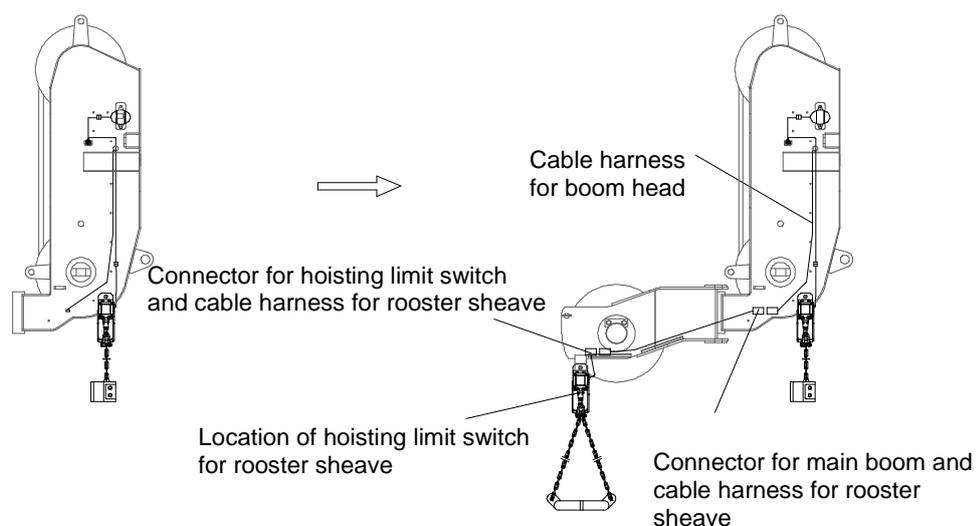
Connection and installation of hoisting limit switch for the rooster sheave
